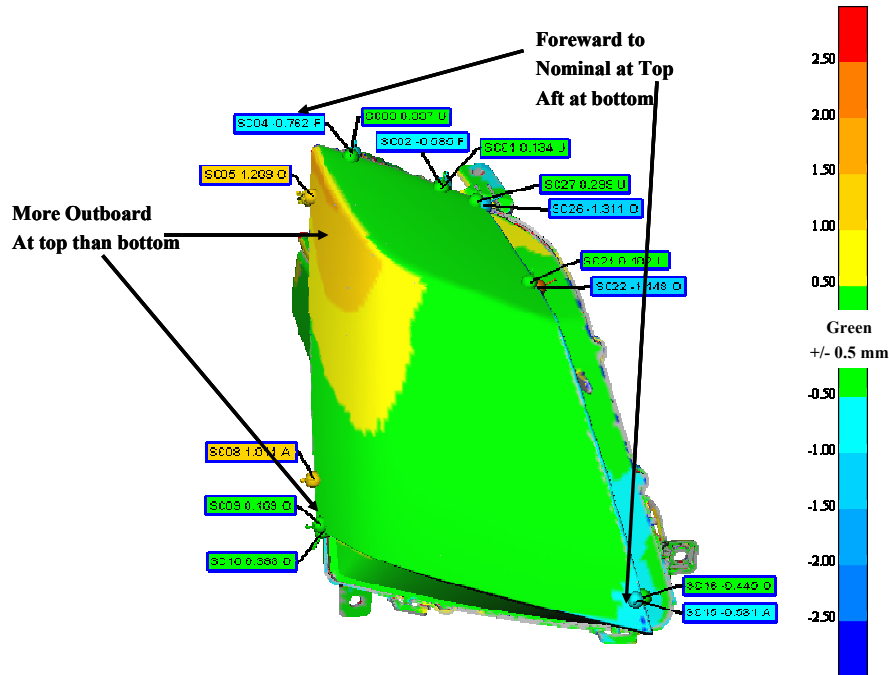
Initial Measurement Condition (Aligned using Assembly GD&T Locators)
